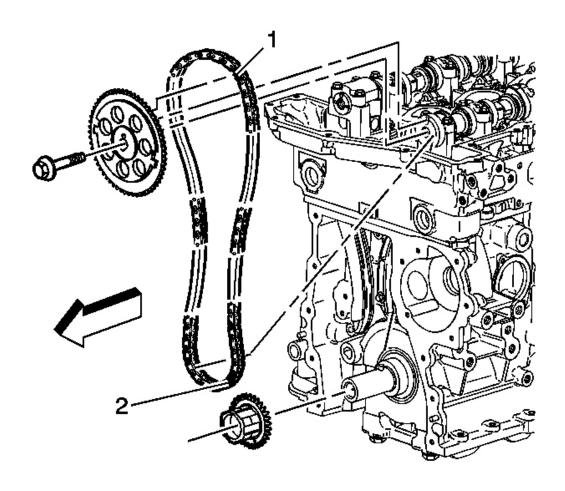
Installing Timing Chain & Sprockets Courtesy of GENERAL MOTORS CORP.
